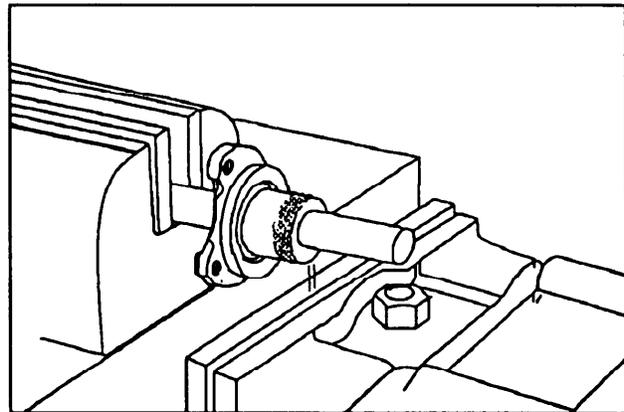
Final lathe-cut being made prior to making an overlay deposit.
